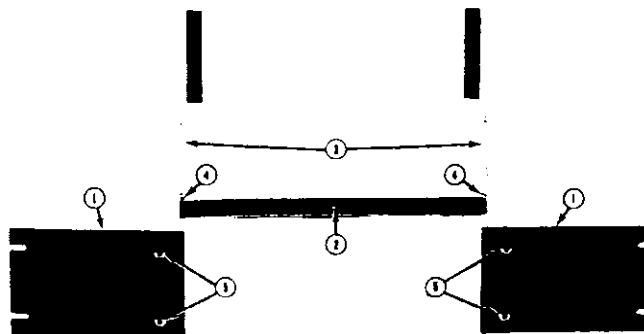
Model 1653 Single Rack Mounting Kit.
